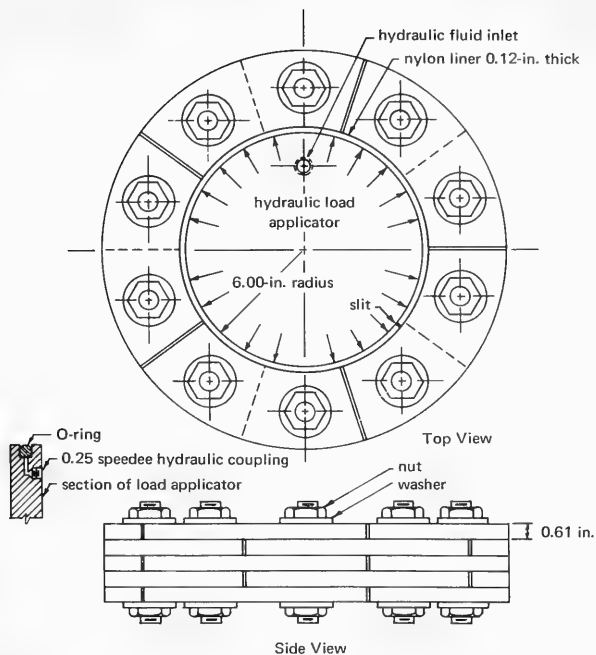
Test assembly composed of five layers of segment modules mounted on hydraulic load applicator.
